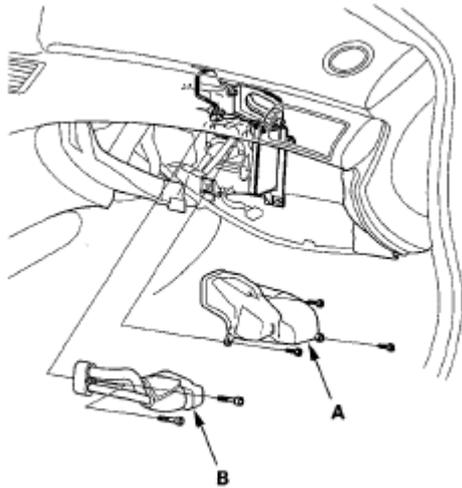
Identifying Expansion Valve Cover And Expansion Valve
